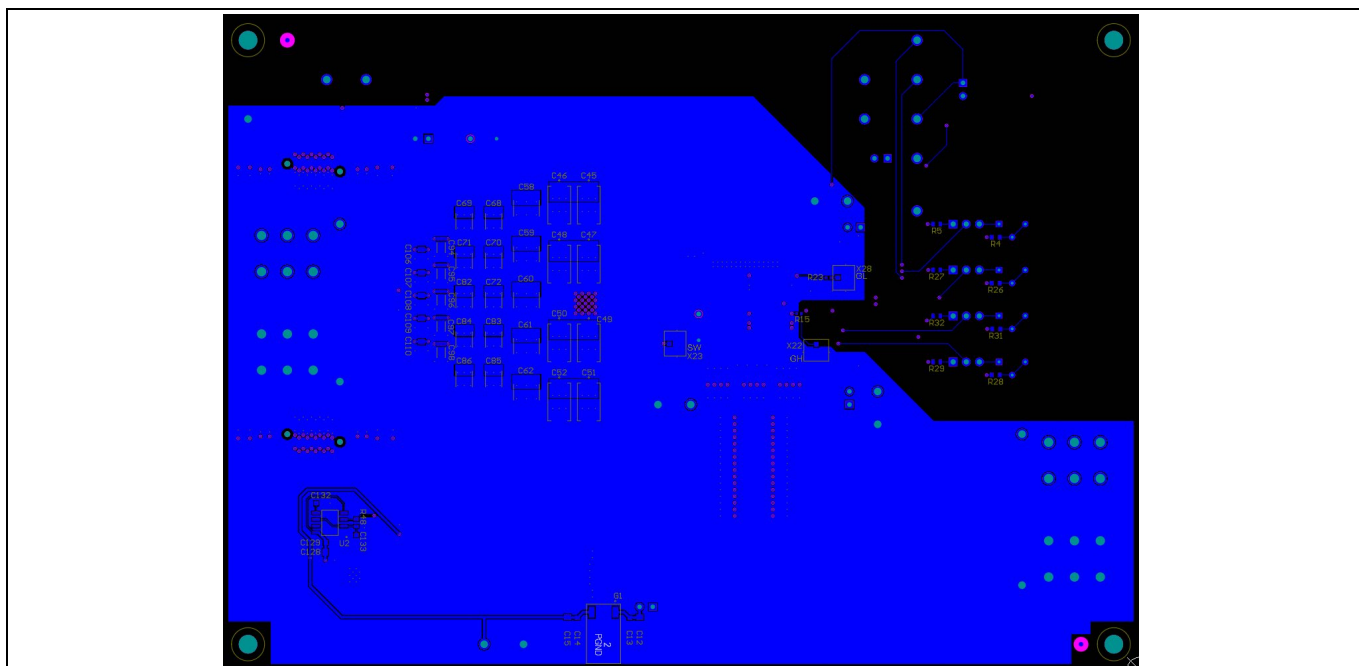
Flipped bottom view of RIC70849EVAL1 bottom layer copper and silkscreen
